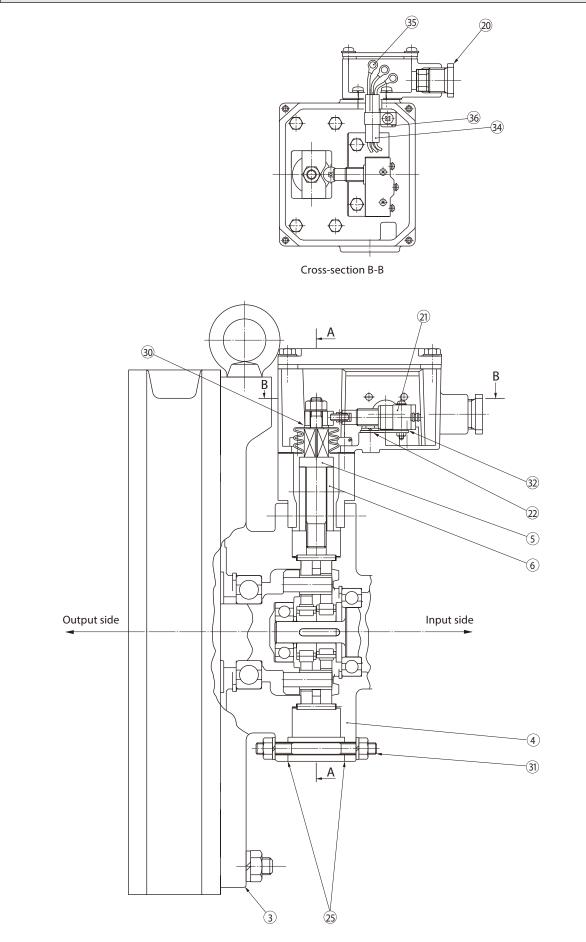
Bevel Gear or Helical Gear 1 Stage + Cyclo 2 Stage Reduction
